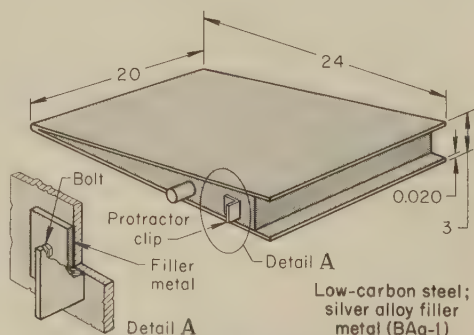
Air-vane assembly on which protractor clip was brazed for alignment in subsequent assembly (Example 585)
